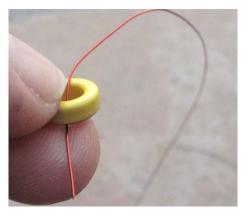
First turn of L1. Short end of the wire is out the bottom side.
